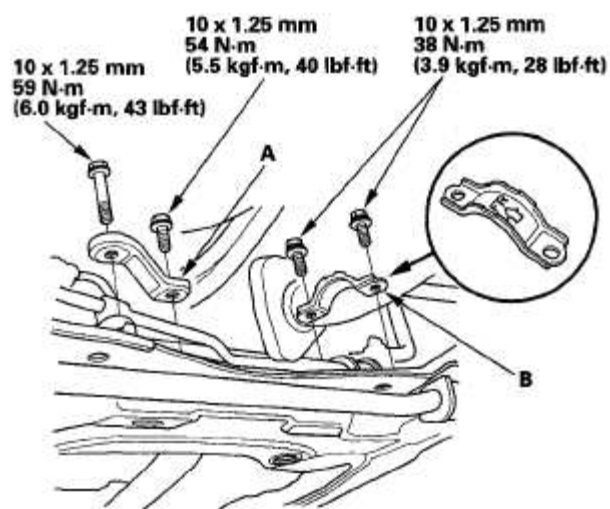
Identifying Steering Gearbox Mounting Bolt And Stiffener Bolt (With Torque Specifications)
